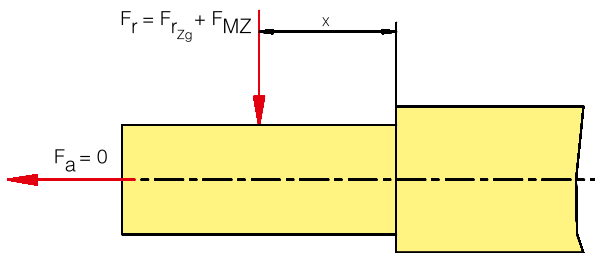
Mechanical drive for a horizontal shaft (straight spur gears)
